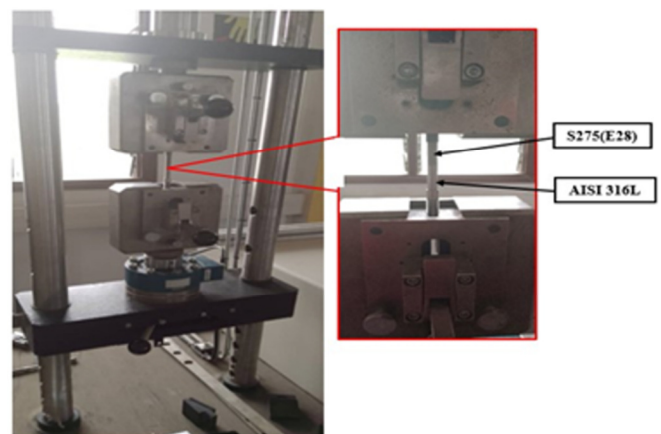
The hydraulic tensile testing machine: EWTGUWP310.
